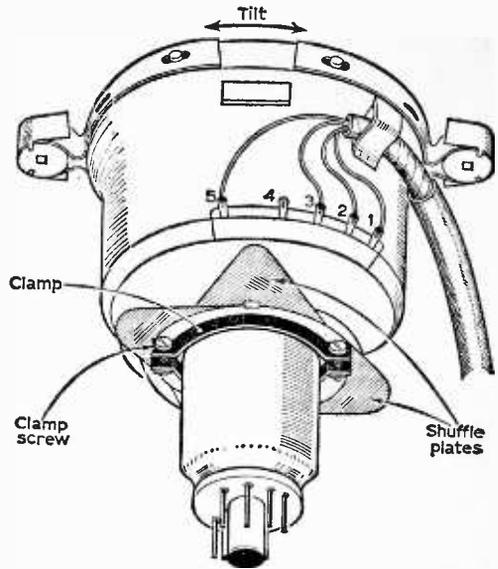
Typical scan coil assembly (Philips). Slackening the clamp screw enables the assembly to be removed from the tube neck. The shuffle plates centre the picture while scan coil rotation levels the picture.
